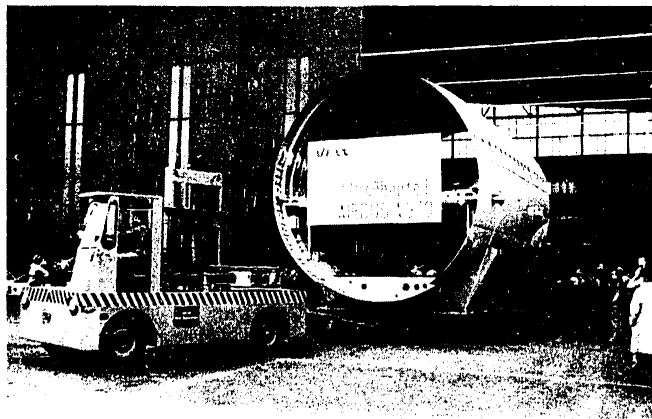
First Section 11 (cockpit) of the A 310, photographed recently at Toulouse. It pertains, on the combined A300-A310 assembly line, to plane no. 162, being built for Swissair (Pratt and Whitney JT9D-7R4 engines).
